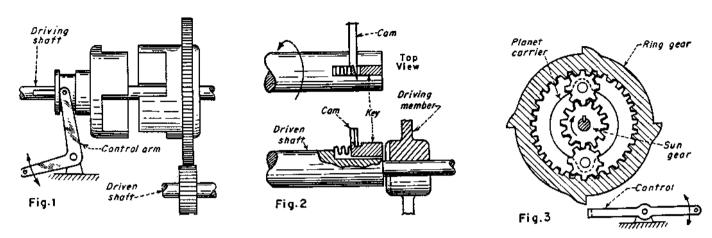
Jaw Clutch: The left sliding half of this clutch is feathered to the driving shaft while the right half rotates freely. The control arm activates the sliding half to engage or disengage the drive. However, this simple, strong clutch is subject to high shock during engagement and the sliding half exhibits high inertia. Moreover, engagement requires long axial motion.
